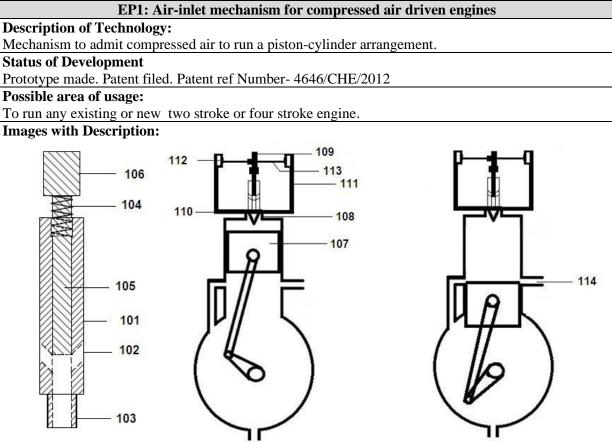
Mechanism to admit compressed air to run a piston-cylinder arrangement.
